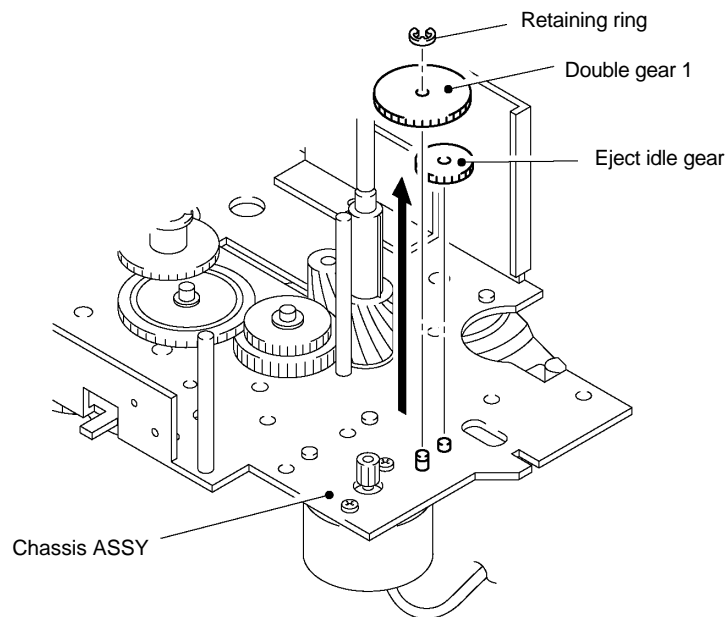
Removing the Double Gear 1 and Eject Idle Gear
